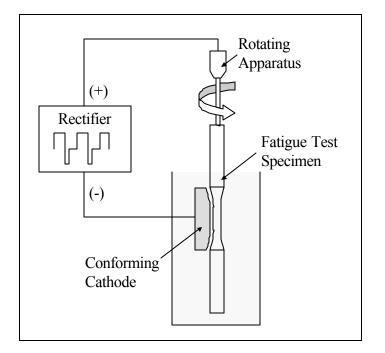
Possible design of a polishing fixture for the round fatigue test specimens.
